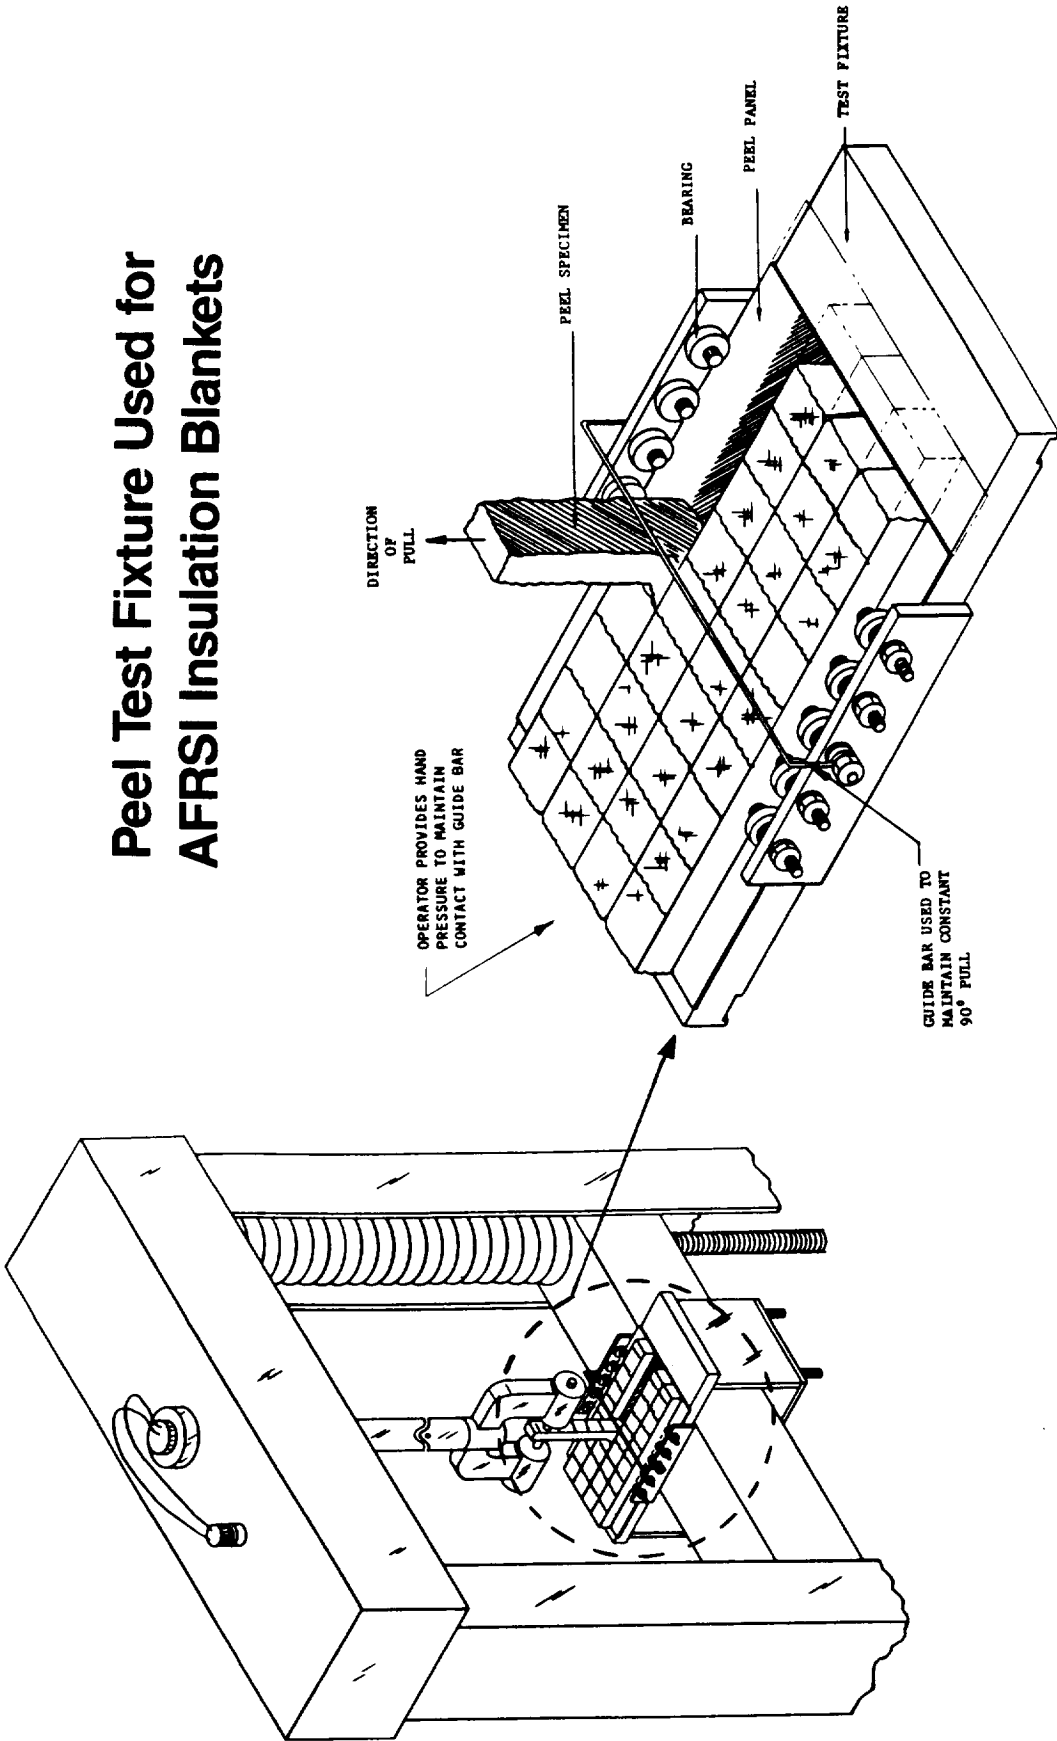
Fixture developed to test the bond strength of AFRSI blankets.
